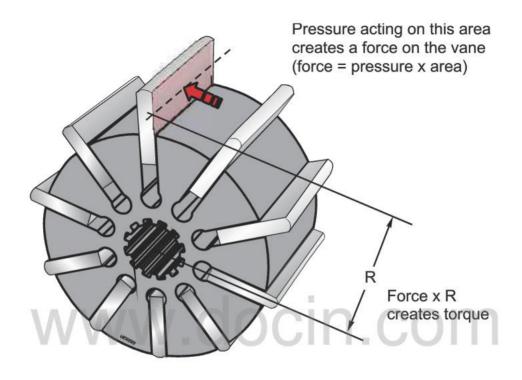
Pressure acting on a vane creates torque on the drive shaft COPYRIGHT © (2001) EATON CORPORATION
